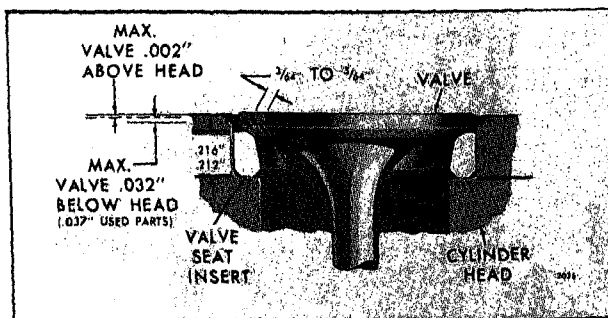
Relationship Between Exhaust Valve, Insert and Cylinder Head (Two Valve Head)
